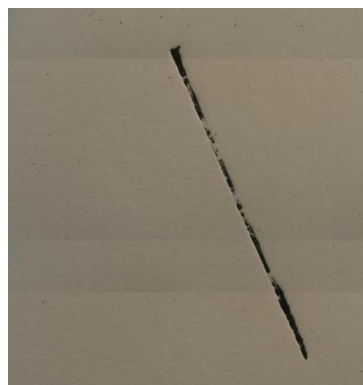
Cross-sectional view of the lack of fusion defect under an optical microscope
